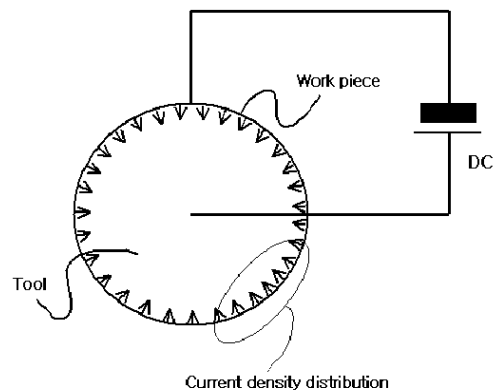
The geometric arrangement of tool and workpiece of moving electrode
